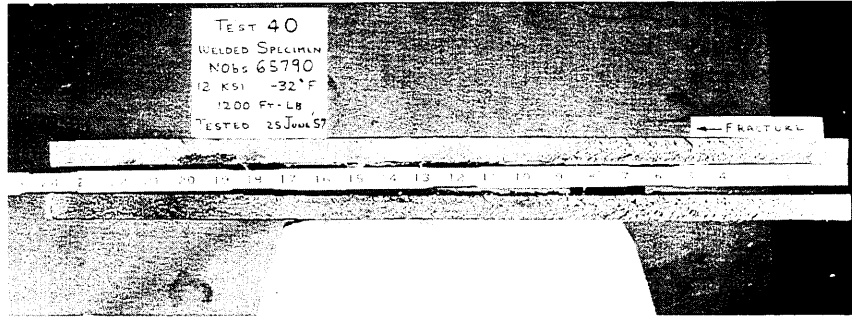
FRACTURE SURFACE -- TEST 40
